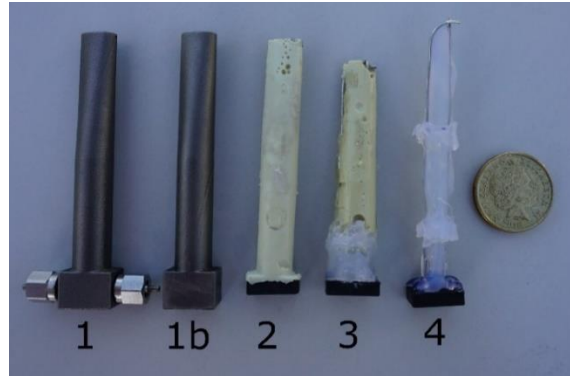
3D printed Pitot tube mold and other parts needed to cast Pitot tubes.
